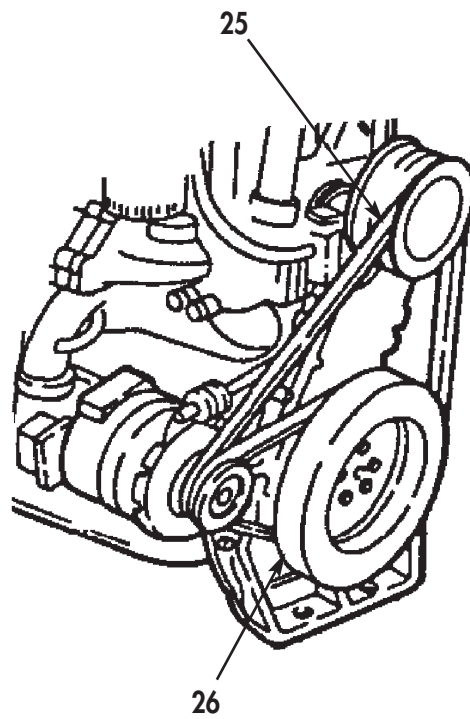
Drive Pulley and Camshaft Pulley Installation.
